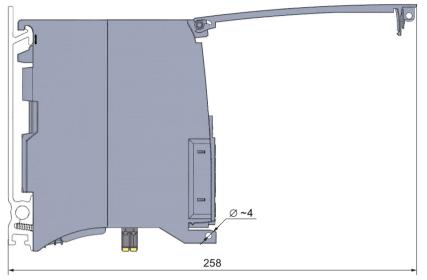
Dimension drawing CPU 1515R-2 PN, side view with open front panel
